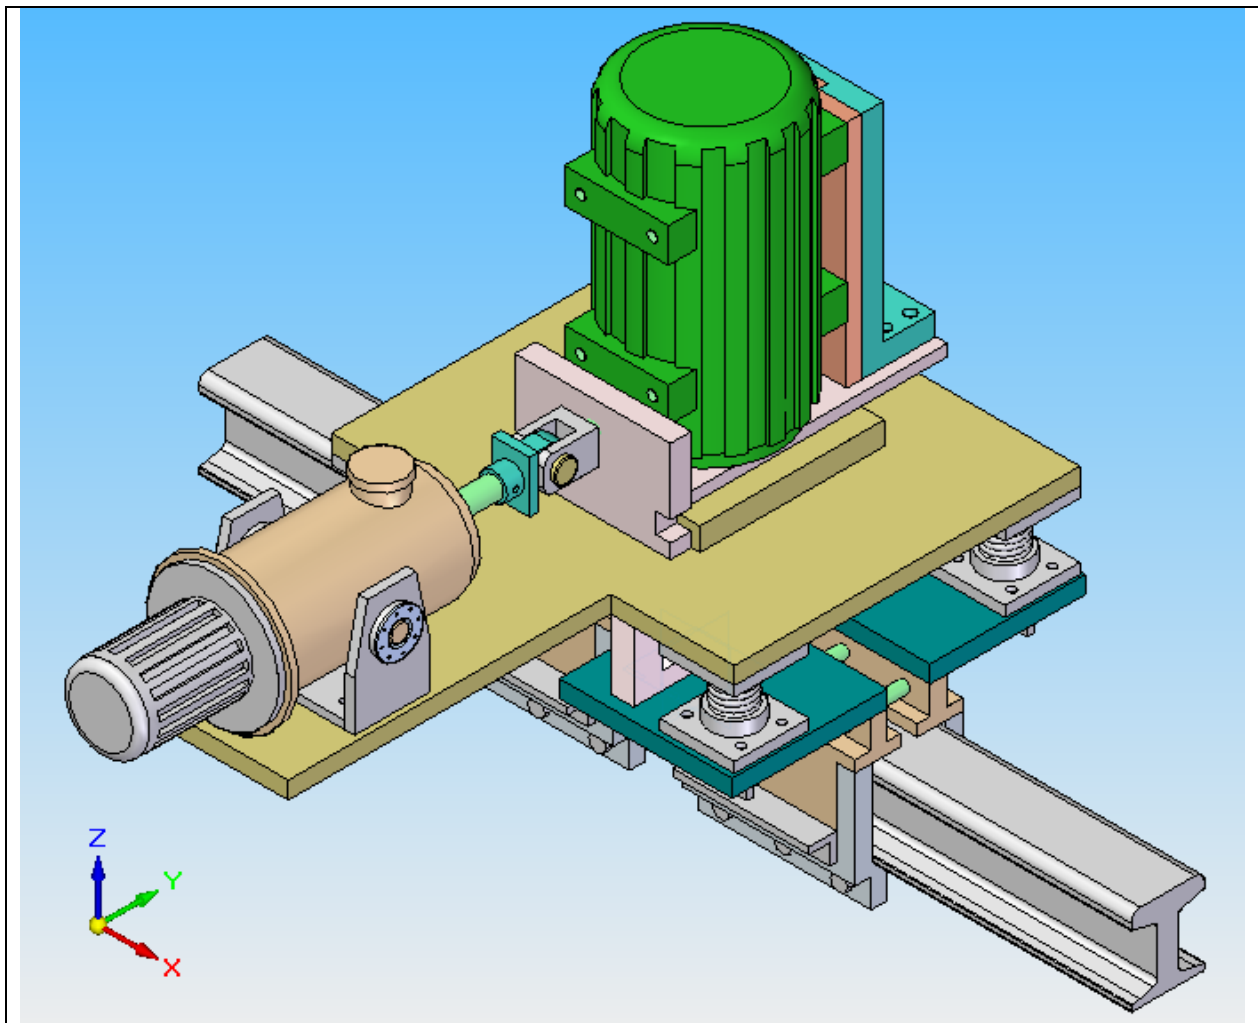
Friction stir welding machine used for joining rails
